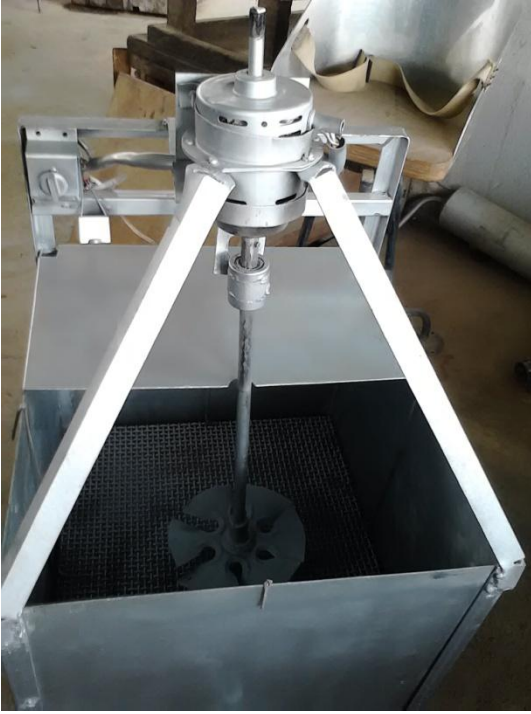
Picture of a full view of electric motor and its support with its regulator on the top side of the quenching bath.
